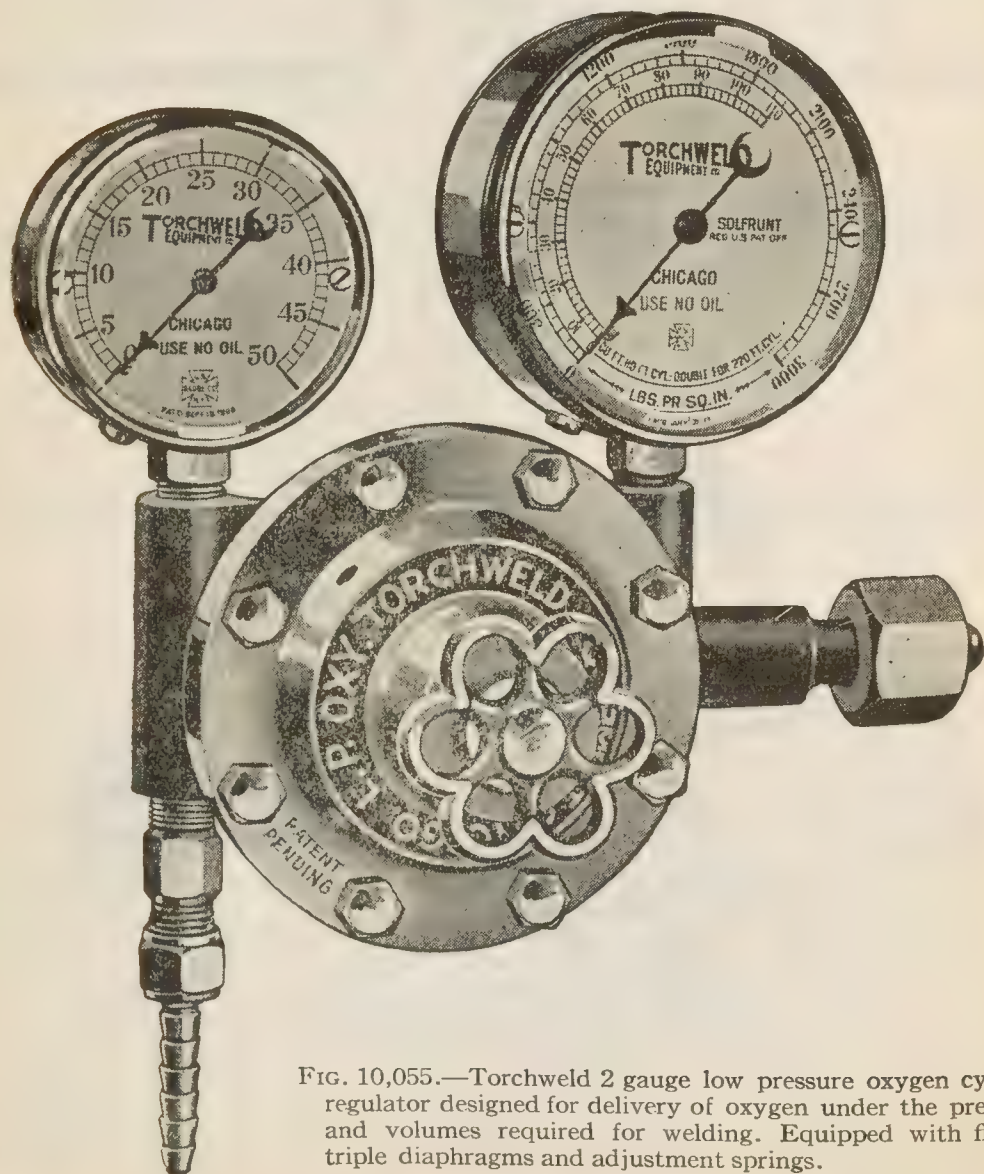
,055.—Torchweld 2 gauge low pressure oxygen cylinder regulator designed for delivery of oxygen under the pressures and volumes required for welding. Equipped with flexible triple diaphragms and adjustment springs.
